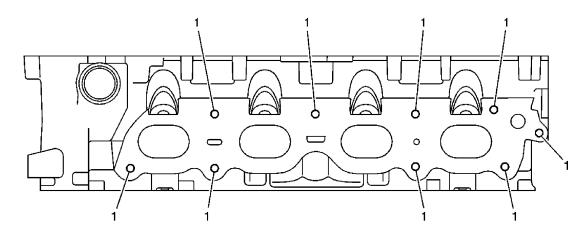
Cylinder Head - Top View Courtesy of GENERAL MOTORS CORP.
